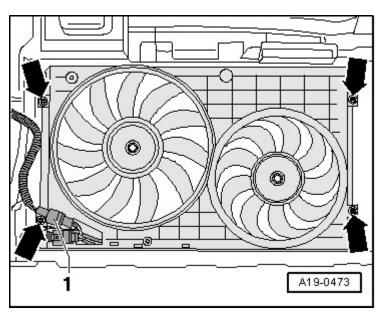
Coolant Fan Control (FC) Control Module J293 Courtesy of AUDI OF AMERICA, LLC
